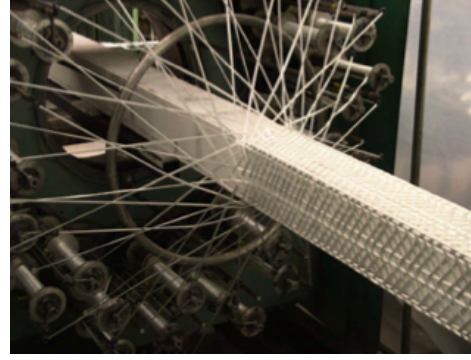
3D braid over a beam girder made from TRC panels¹⁶¹
